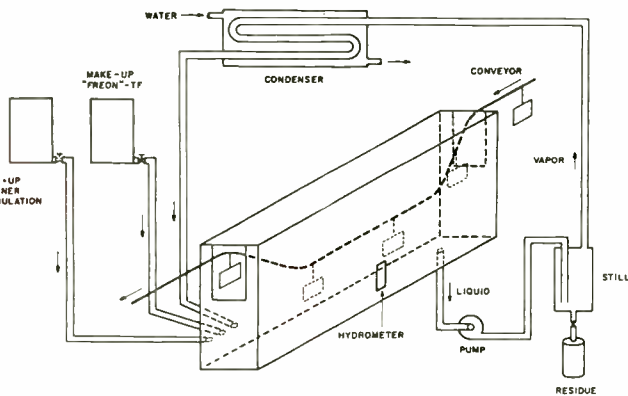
Schematic drawing of equipment for using "Freon" printed circuit cleaning formulation.
